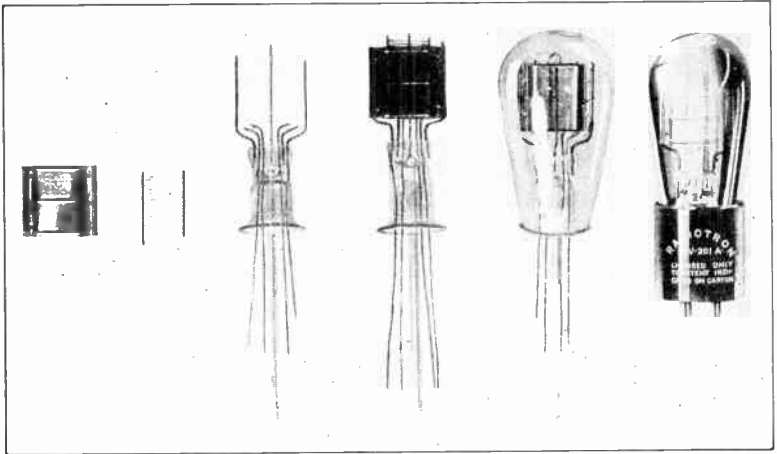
A Vacuum Tube in Various Stages of Assembly.
